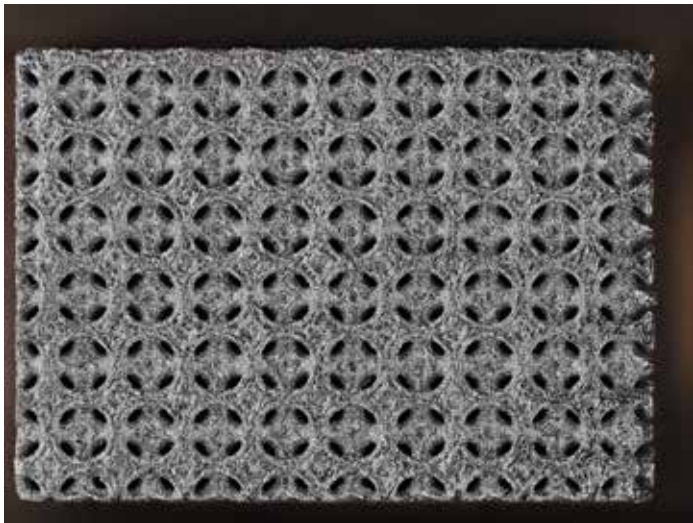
Macro photography view of 12x17mm heated face of lattice after 3,400 heating cycles. Upon close inspection the image shows the largest crack at the bottom of the image (just to the right of centre).
